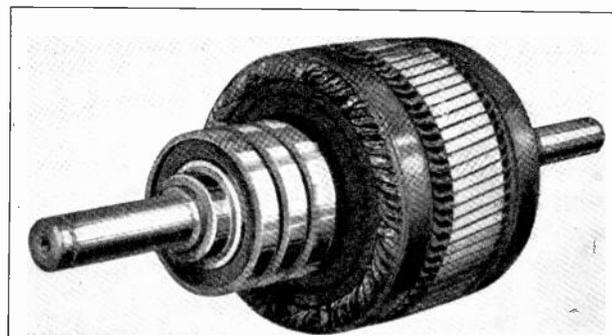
Wound rotor of a variable speed slip-ring motor. This rotor has windings of insulated copper wire similar to those in D. C. armatures.
